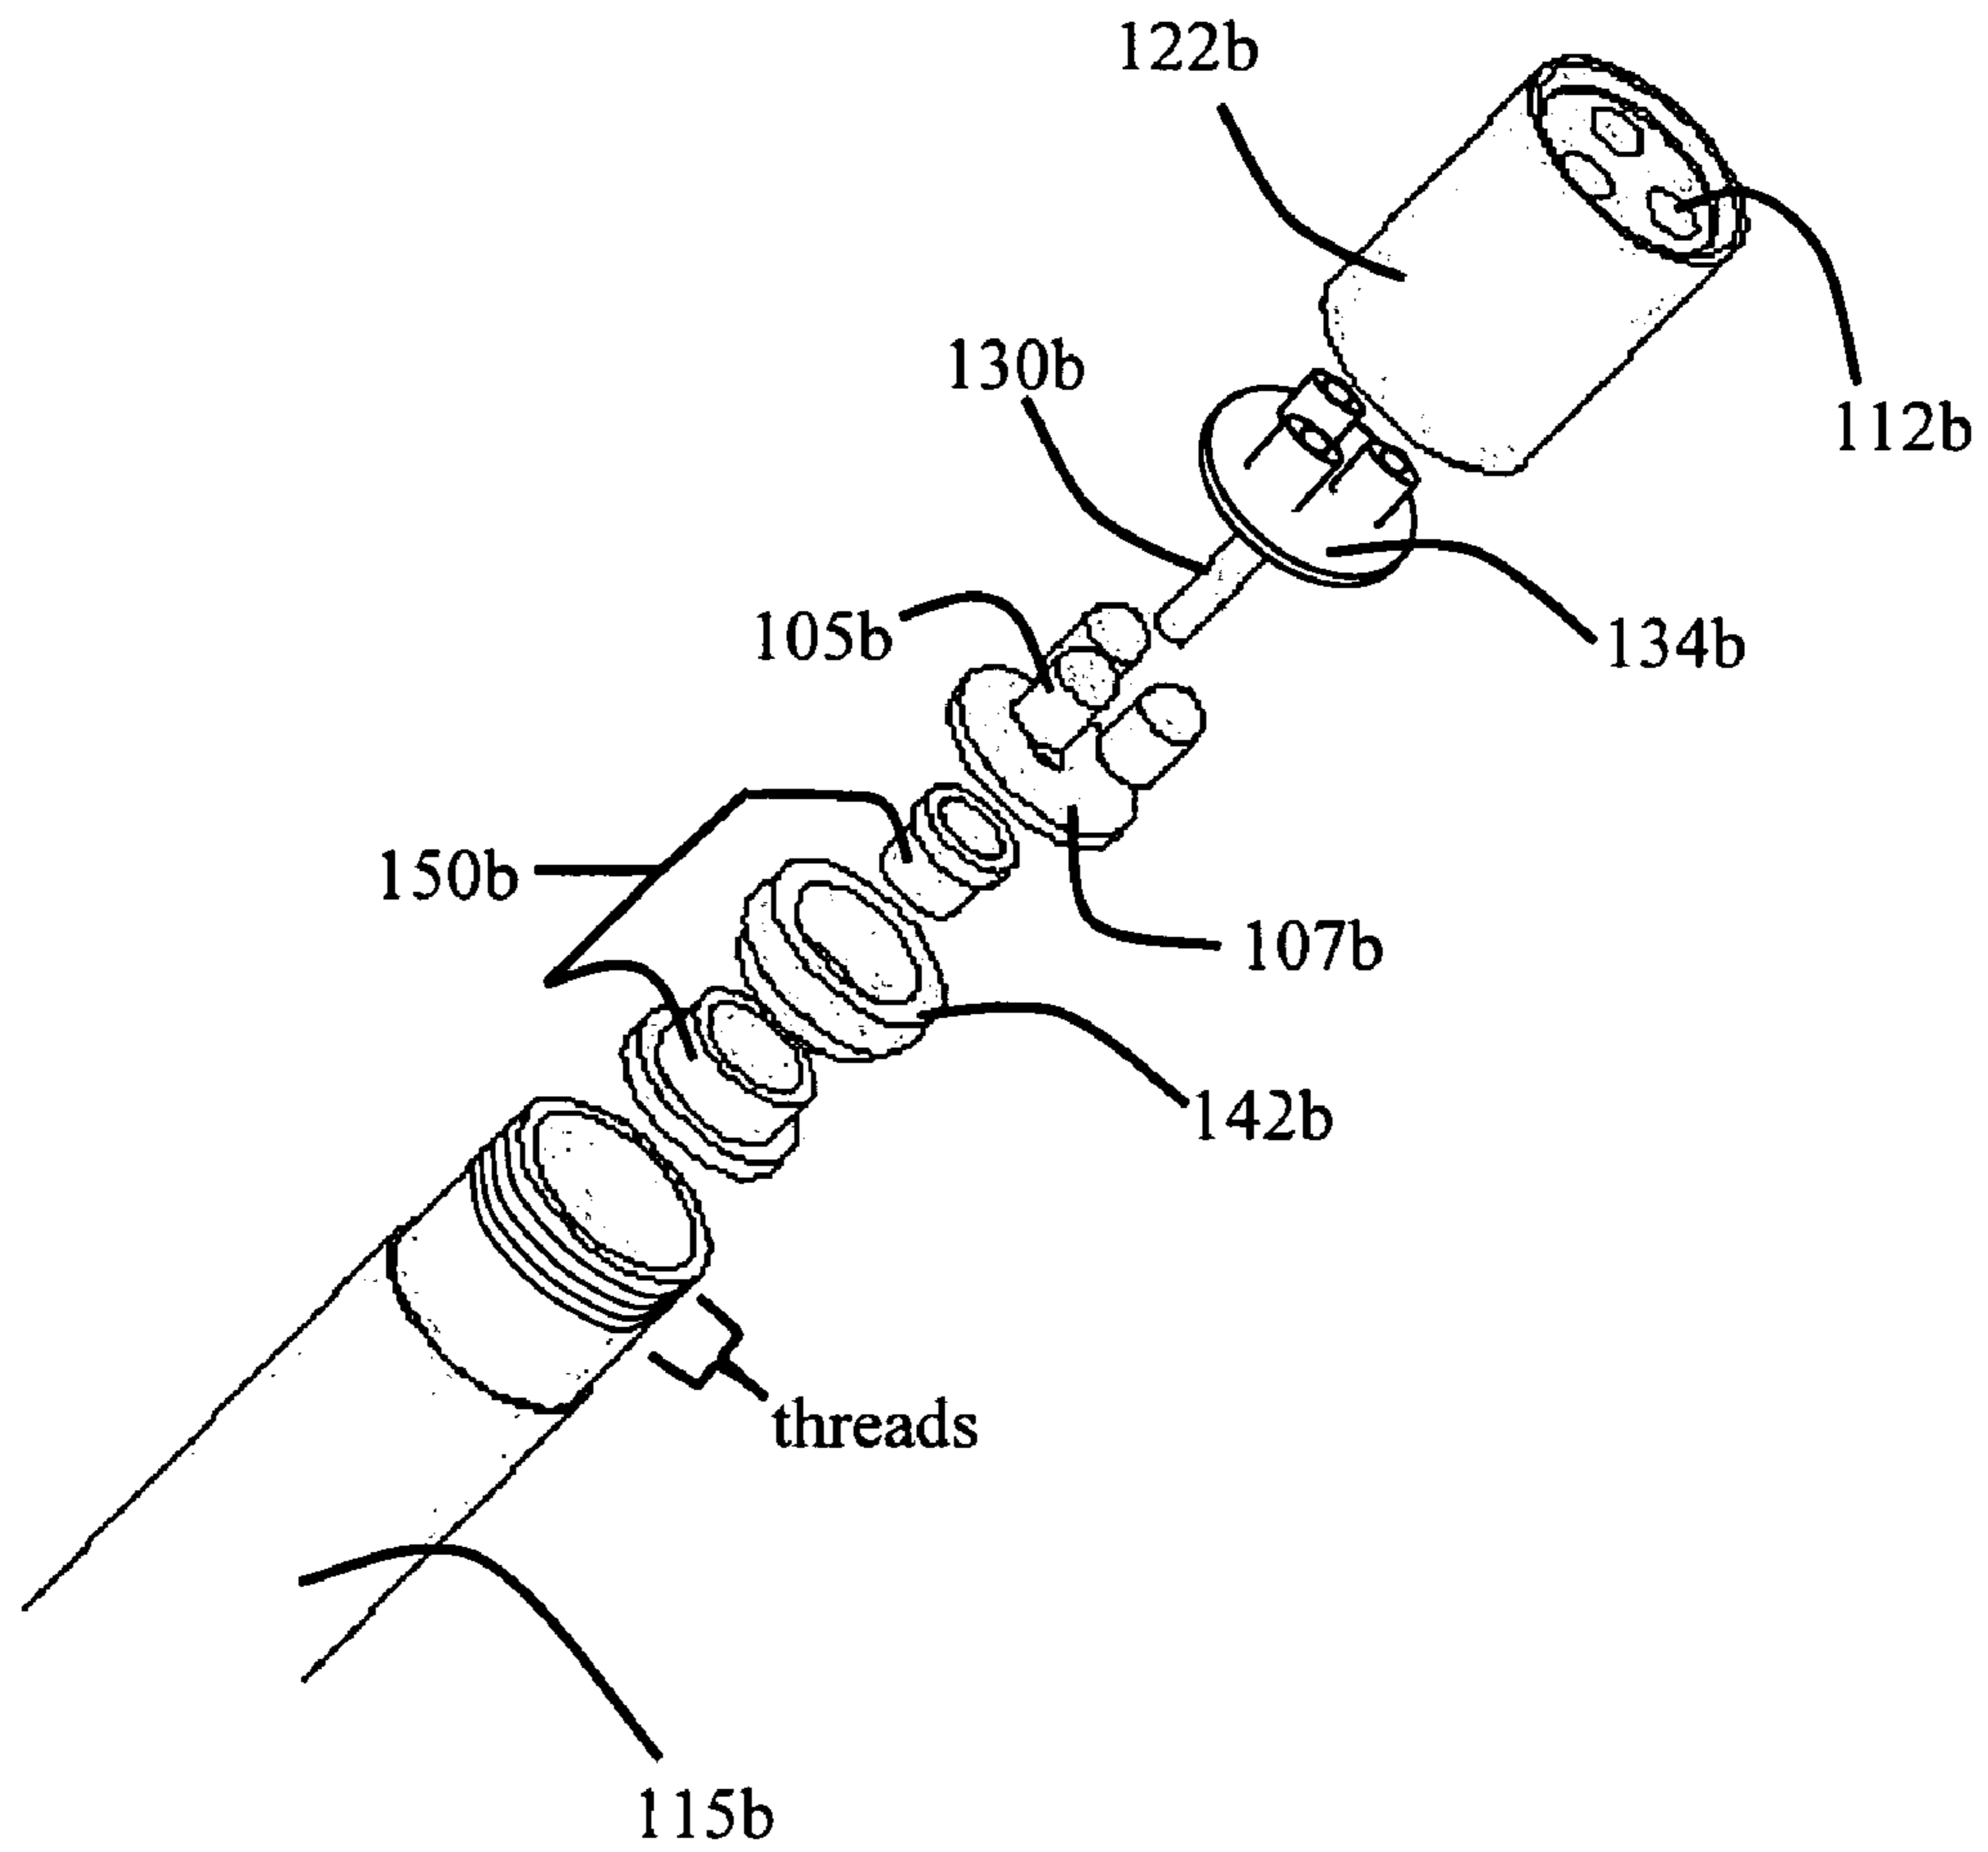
B: Exploded Perspective View of the Preferred Embodiment.
